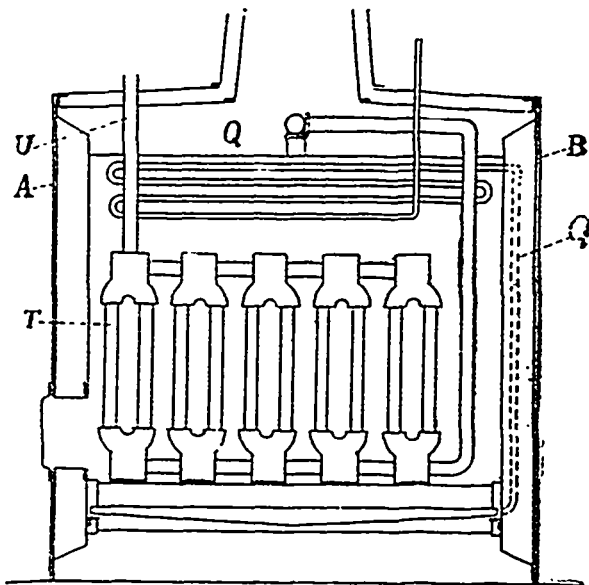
Side elevation Finlayson Boiler, showing particularly the arrangement of super-heating coil (T), its connection with steam-drum, and out-flow through engine supply pipe U. A super-heating coil lies on either side of furnace.
